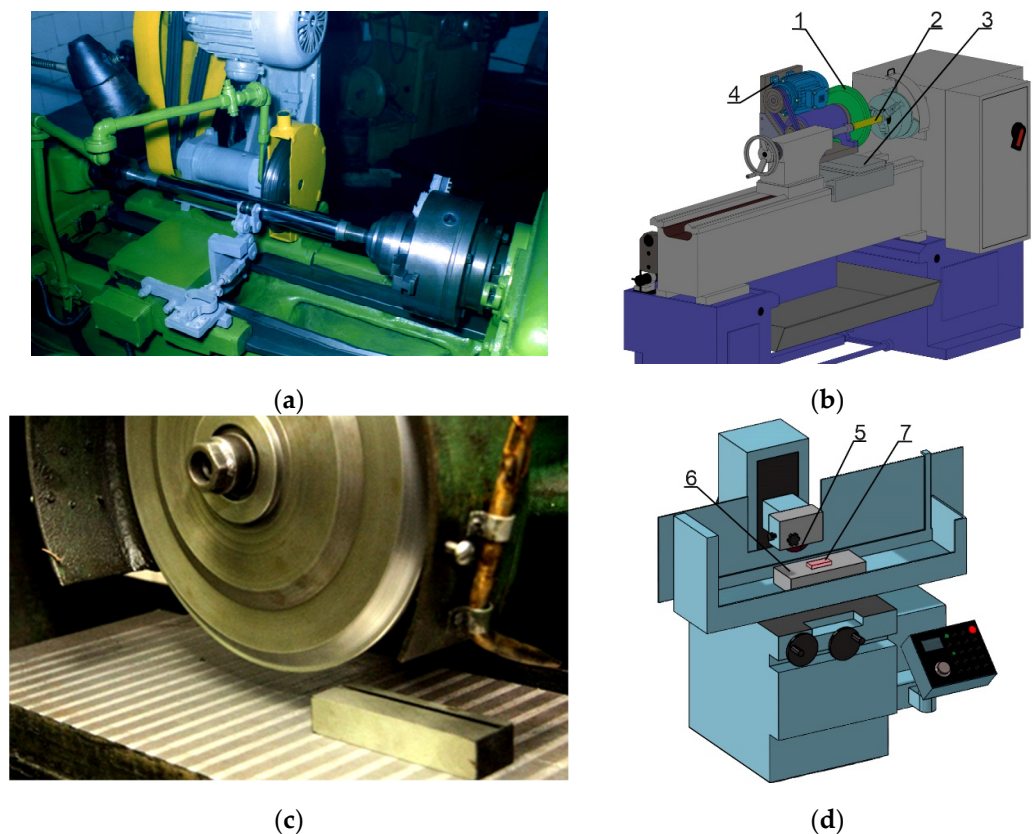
Lather (a) and the setup for the MPT of the cylindrical surface of machine parts (b): 1—tool; 2—specimen with the cylindrical surface; 3—carriage; 4—the device with an autonomous tool drive. Surface grinding machine (c) and the setup for the MPT of the flat surface of machine parts (d): 5—tool; 6—table of the machine; 7—specimen.
